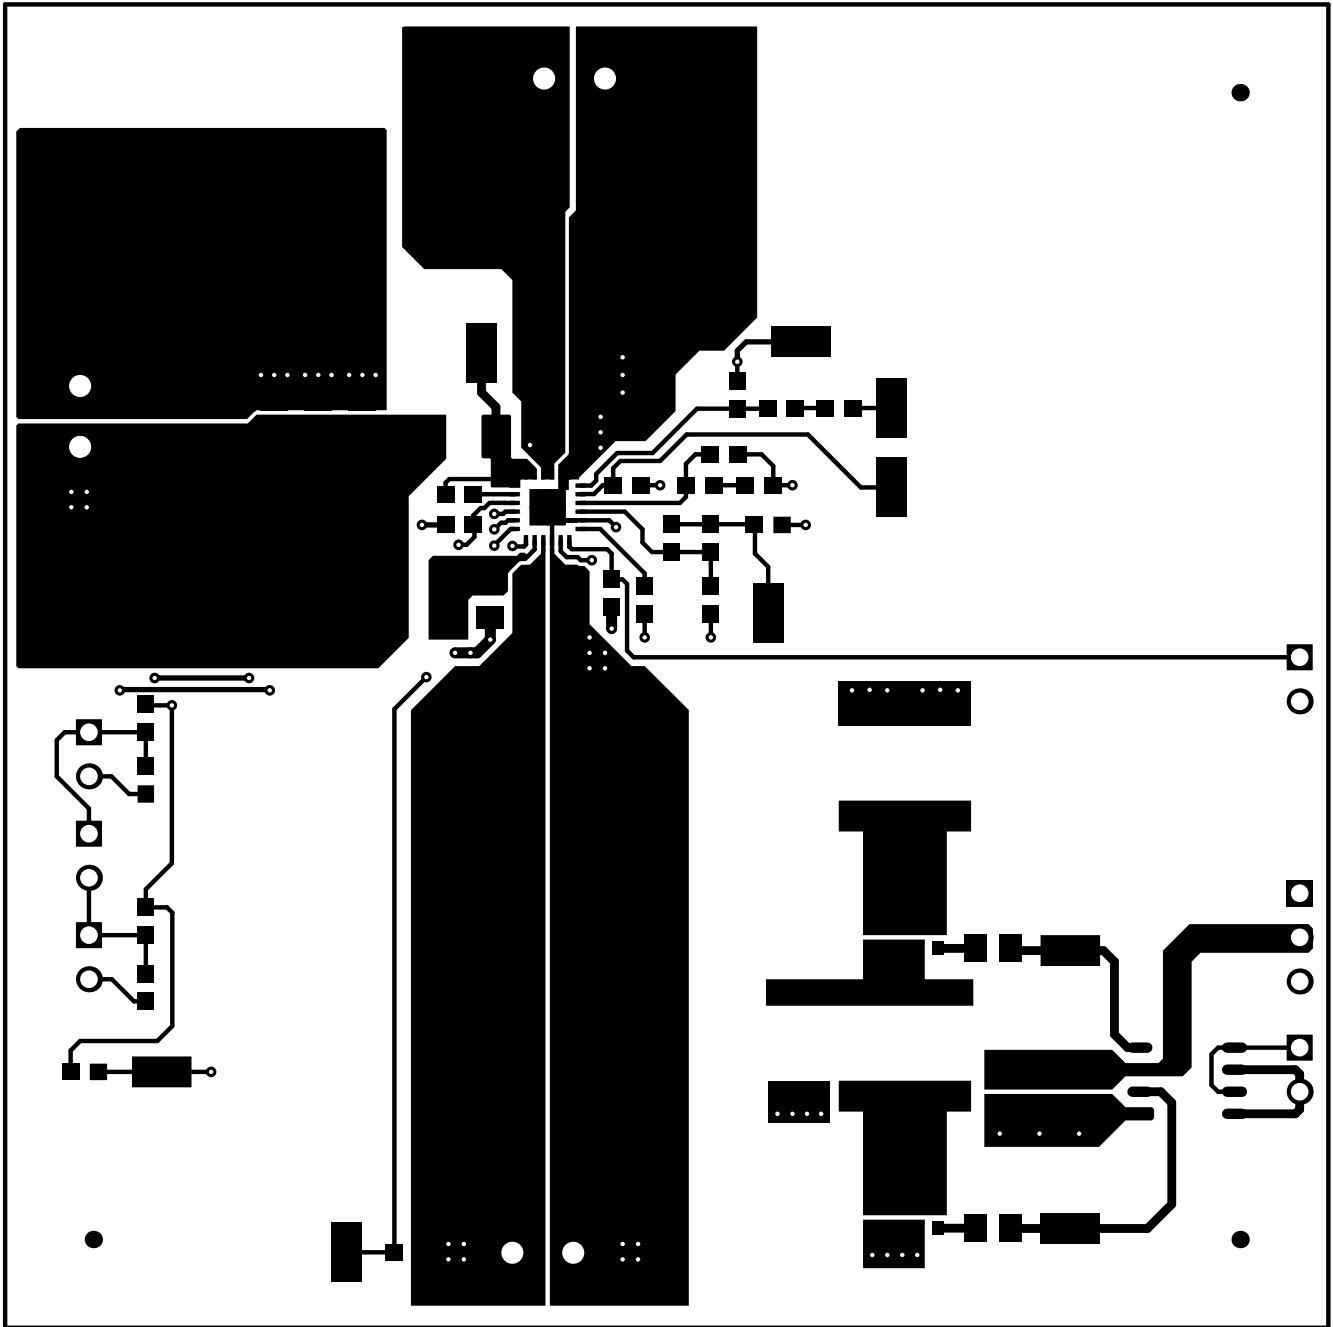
TPS54116-Q1EVM-830 Top-Side Layout
